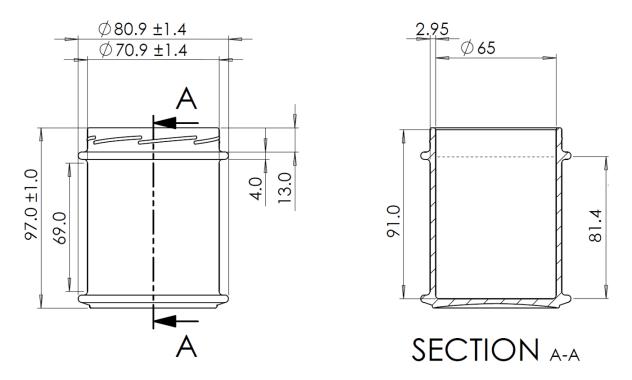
Technical drawings of the exemplary reusable glass packaging design
